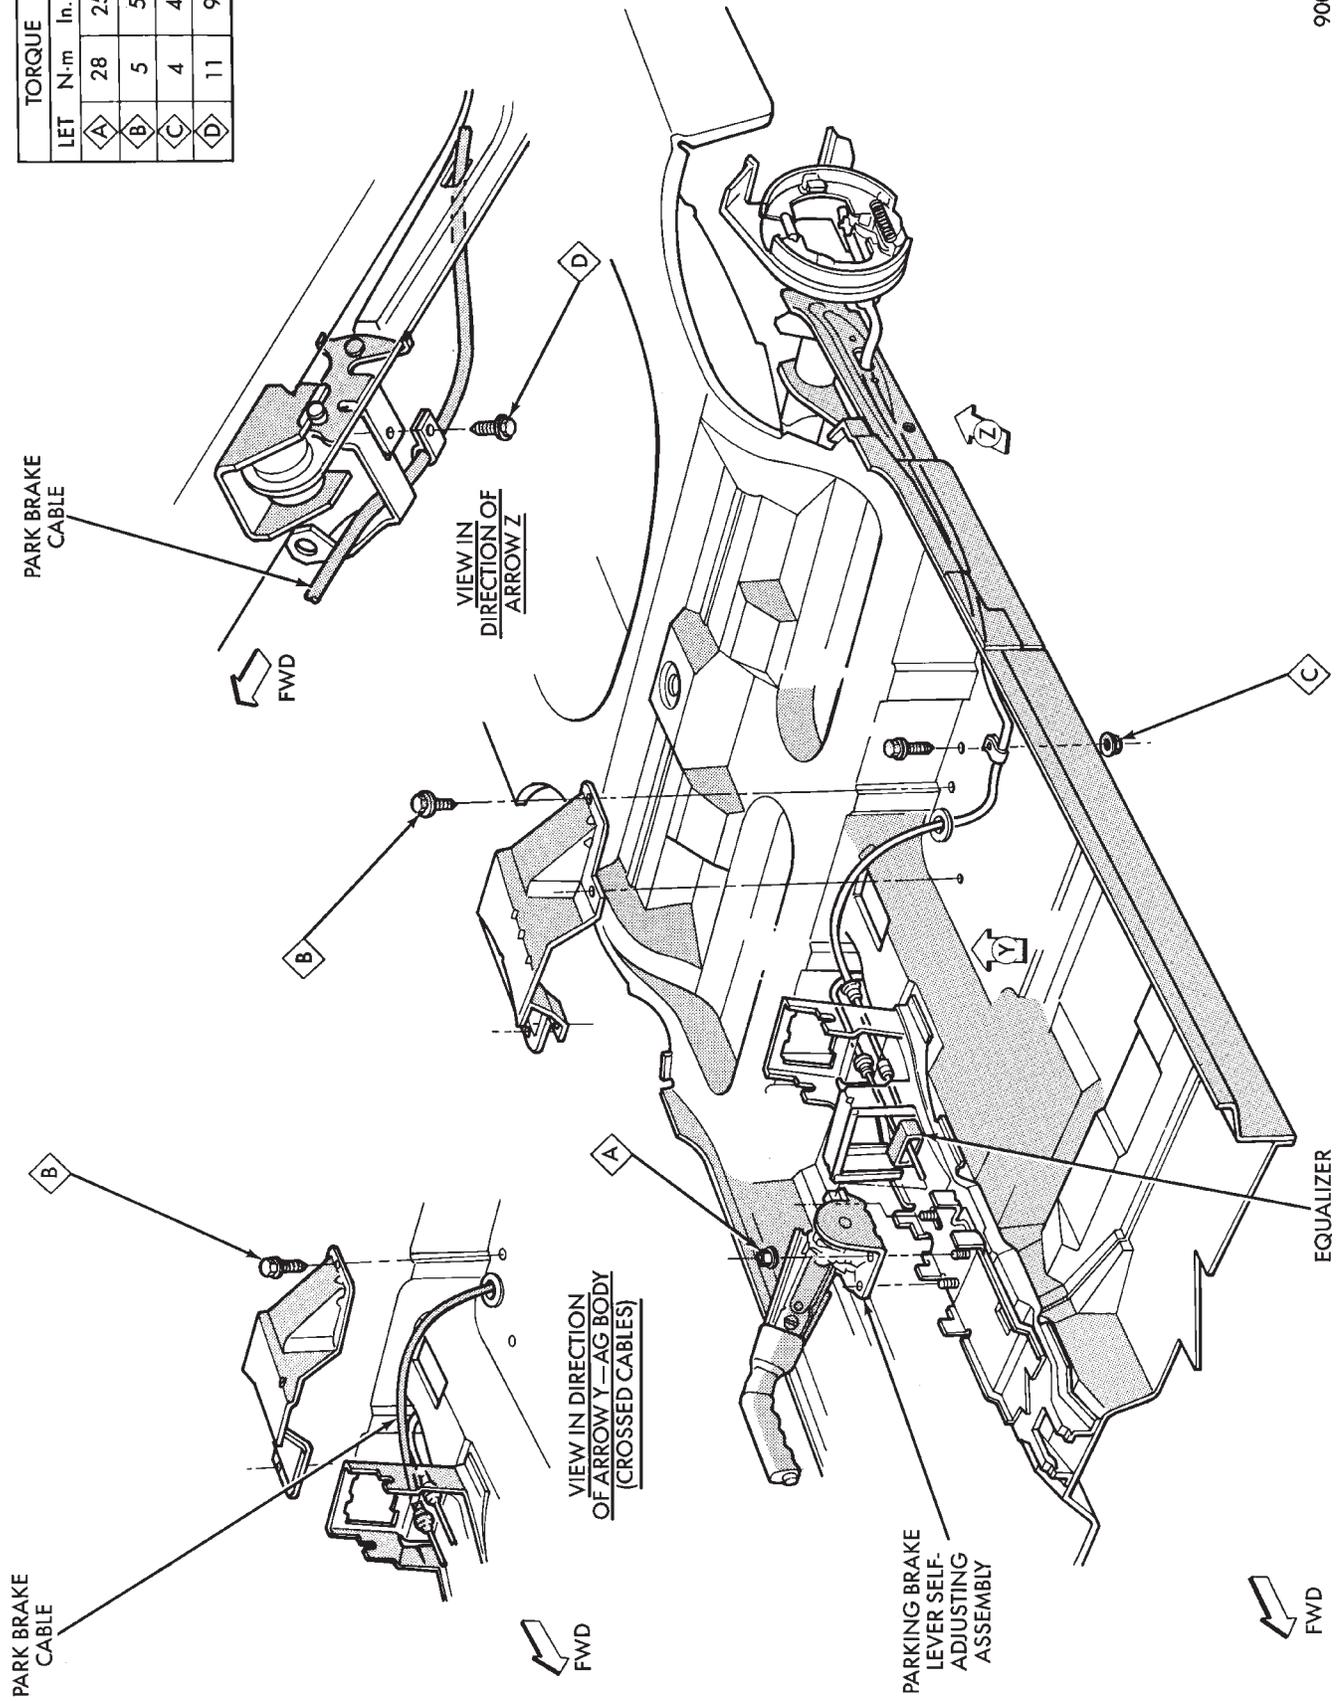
PARKING BRAKE CABLE ROUTING AG AND AJ BODY
